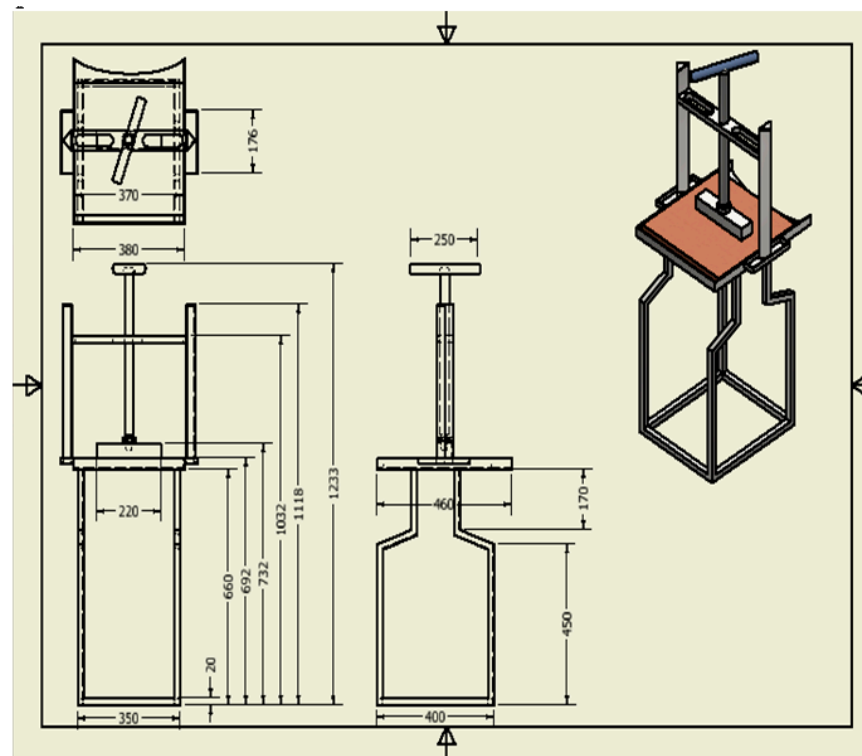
Assembly drawing of the component parts of a cubing machine. All dimensions are in millimetre (mm).
